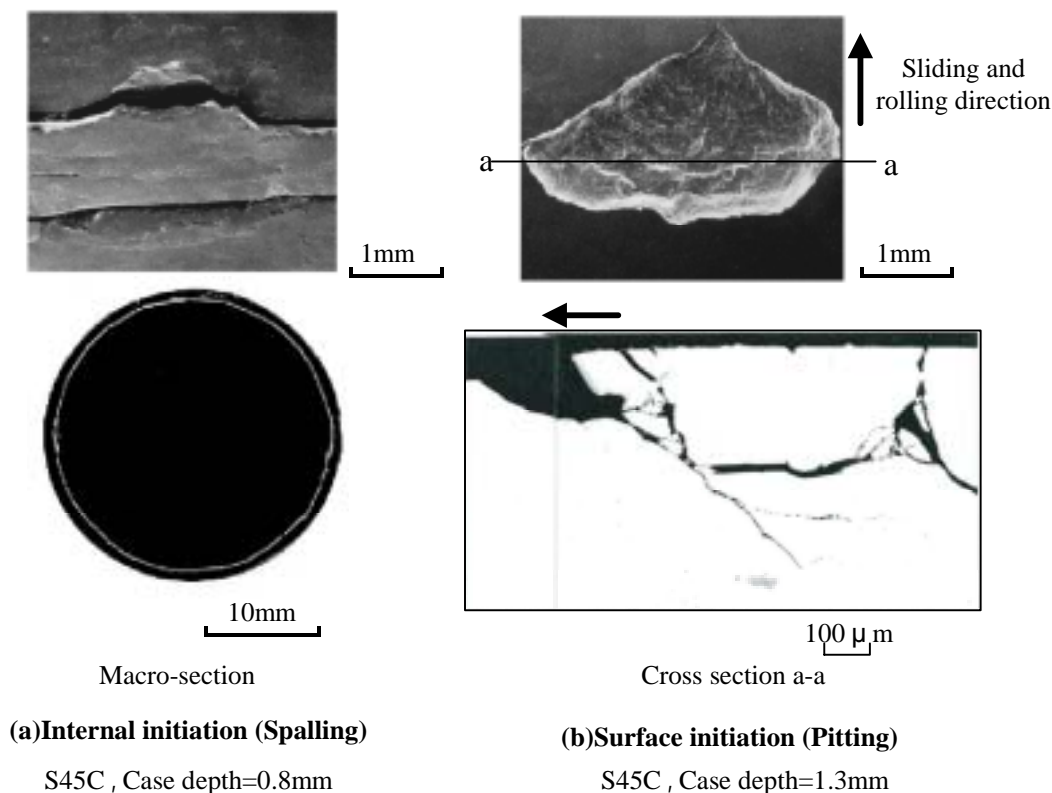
Fracture surface and section profile of two types of pitting failure
